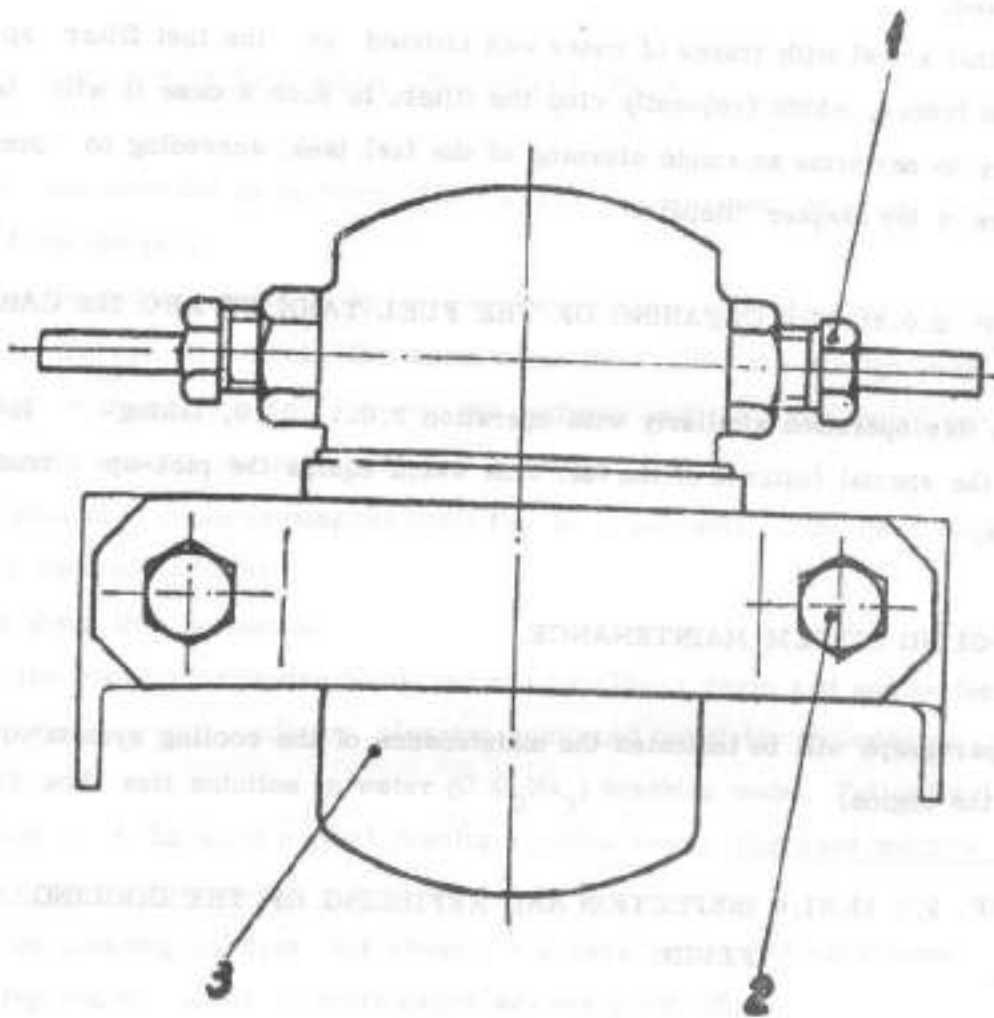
1. Fuel line connecting nut; 2. Bolt fastening fuel filter clamping blade; 3. Lower filter body.
